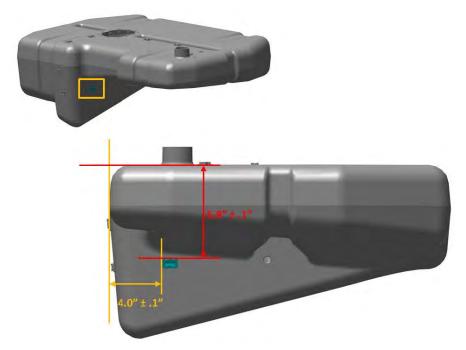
CABLE TIE ANCHOR MOUNT EXTERIOR LOCATION 8.
